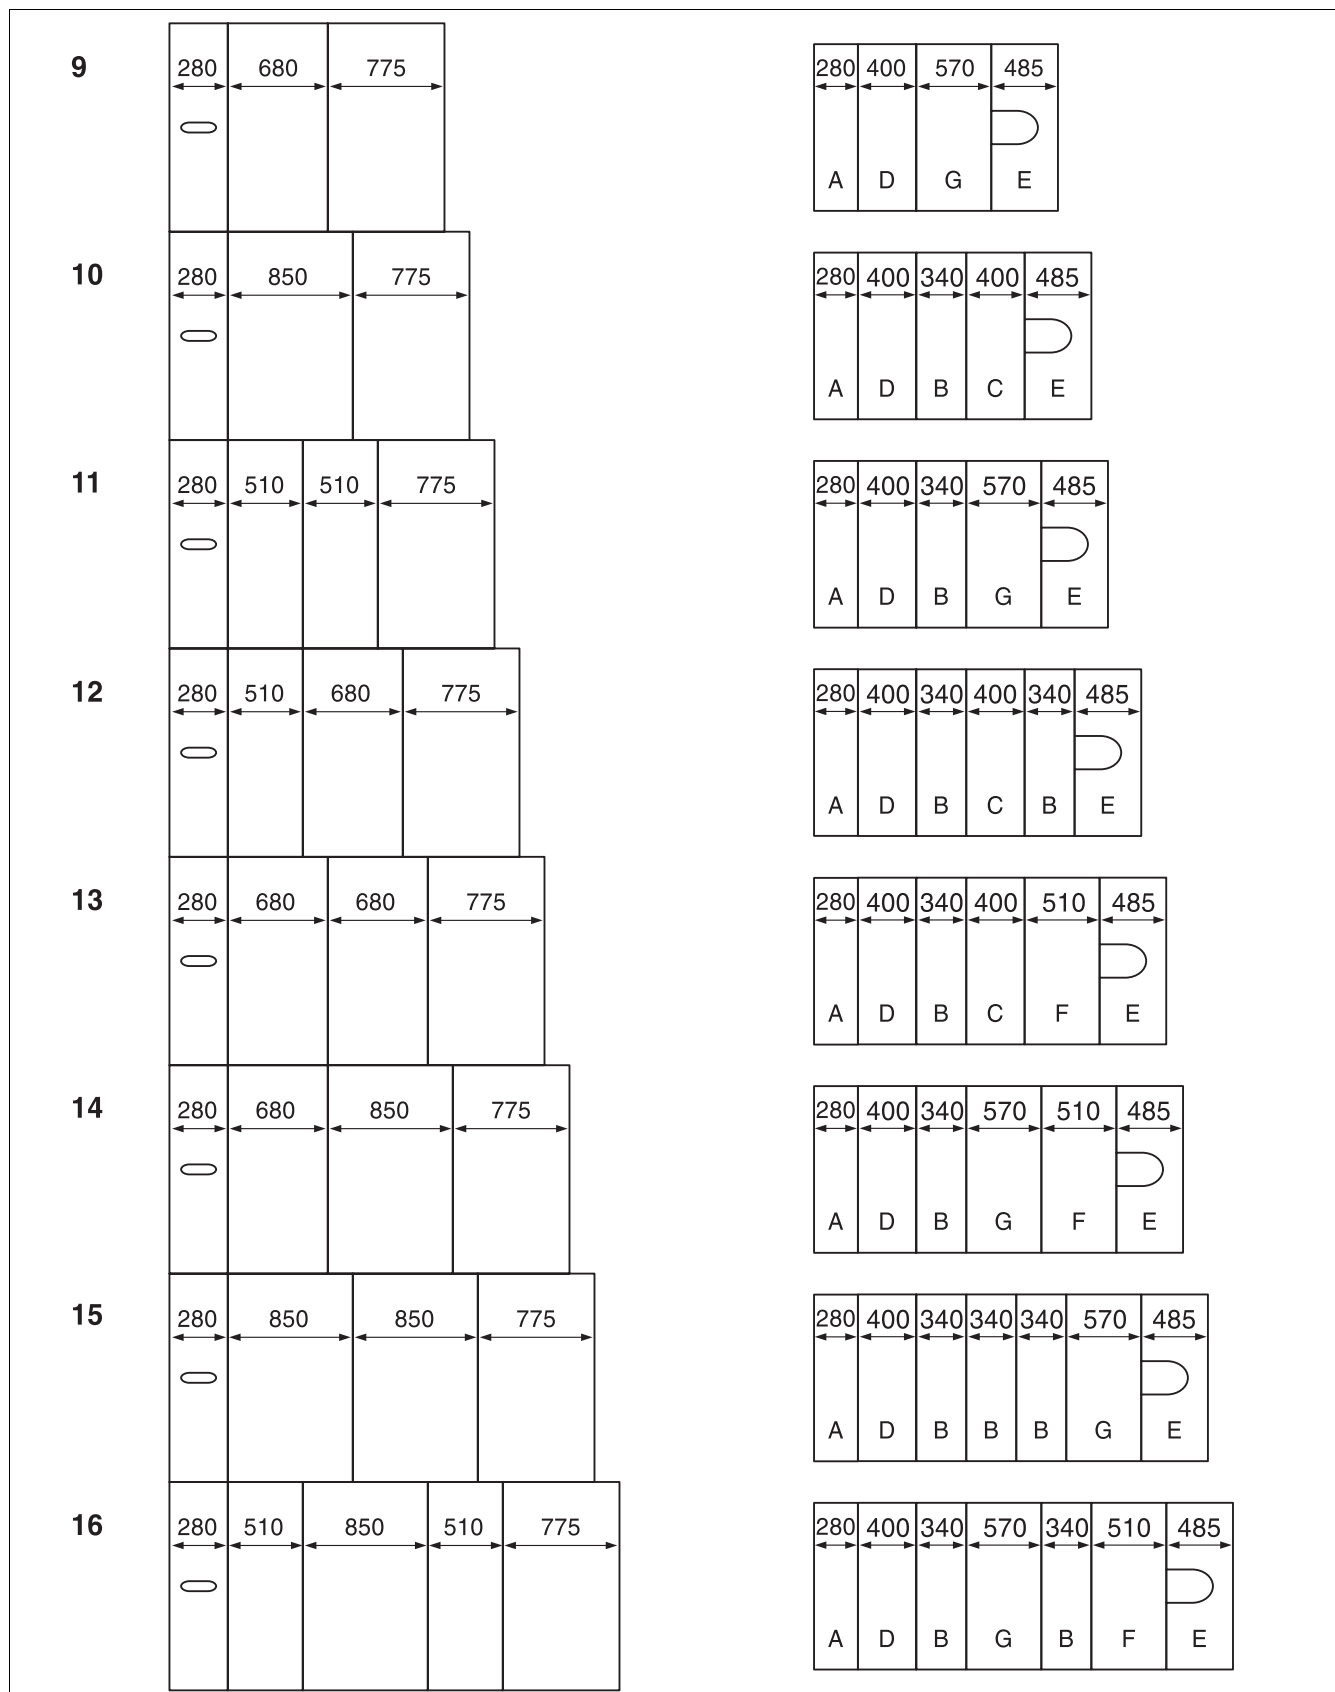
Arrangement of side panels (left) and hoods (right) for the various boiler sizes (dimensions in mm)
